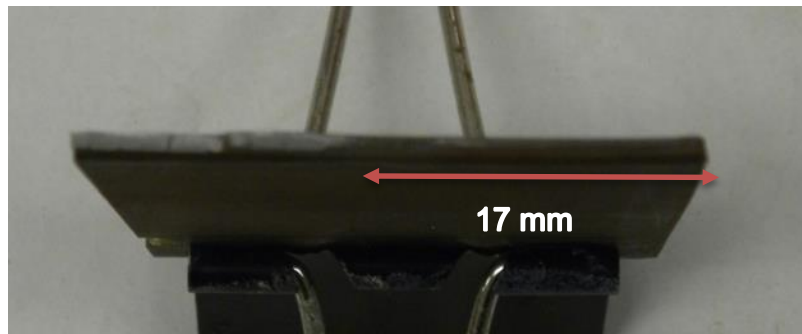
Photo of fracture surface of sample F2 (90%)
